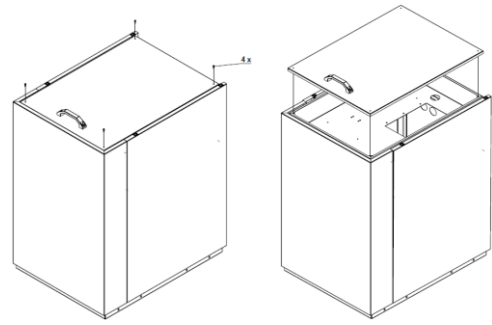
Disassembly process for the electrical cabinet cover of Clausius heat pumps with Classic configuration.
